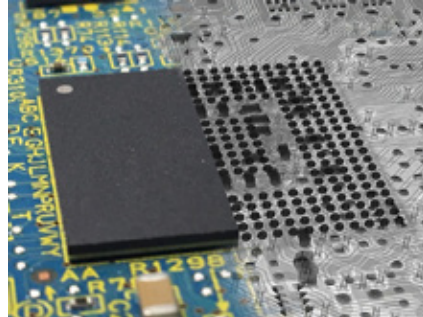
Optical (left) vs. X-ray (right) inspection of a BGA on a printed circuit board.
